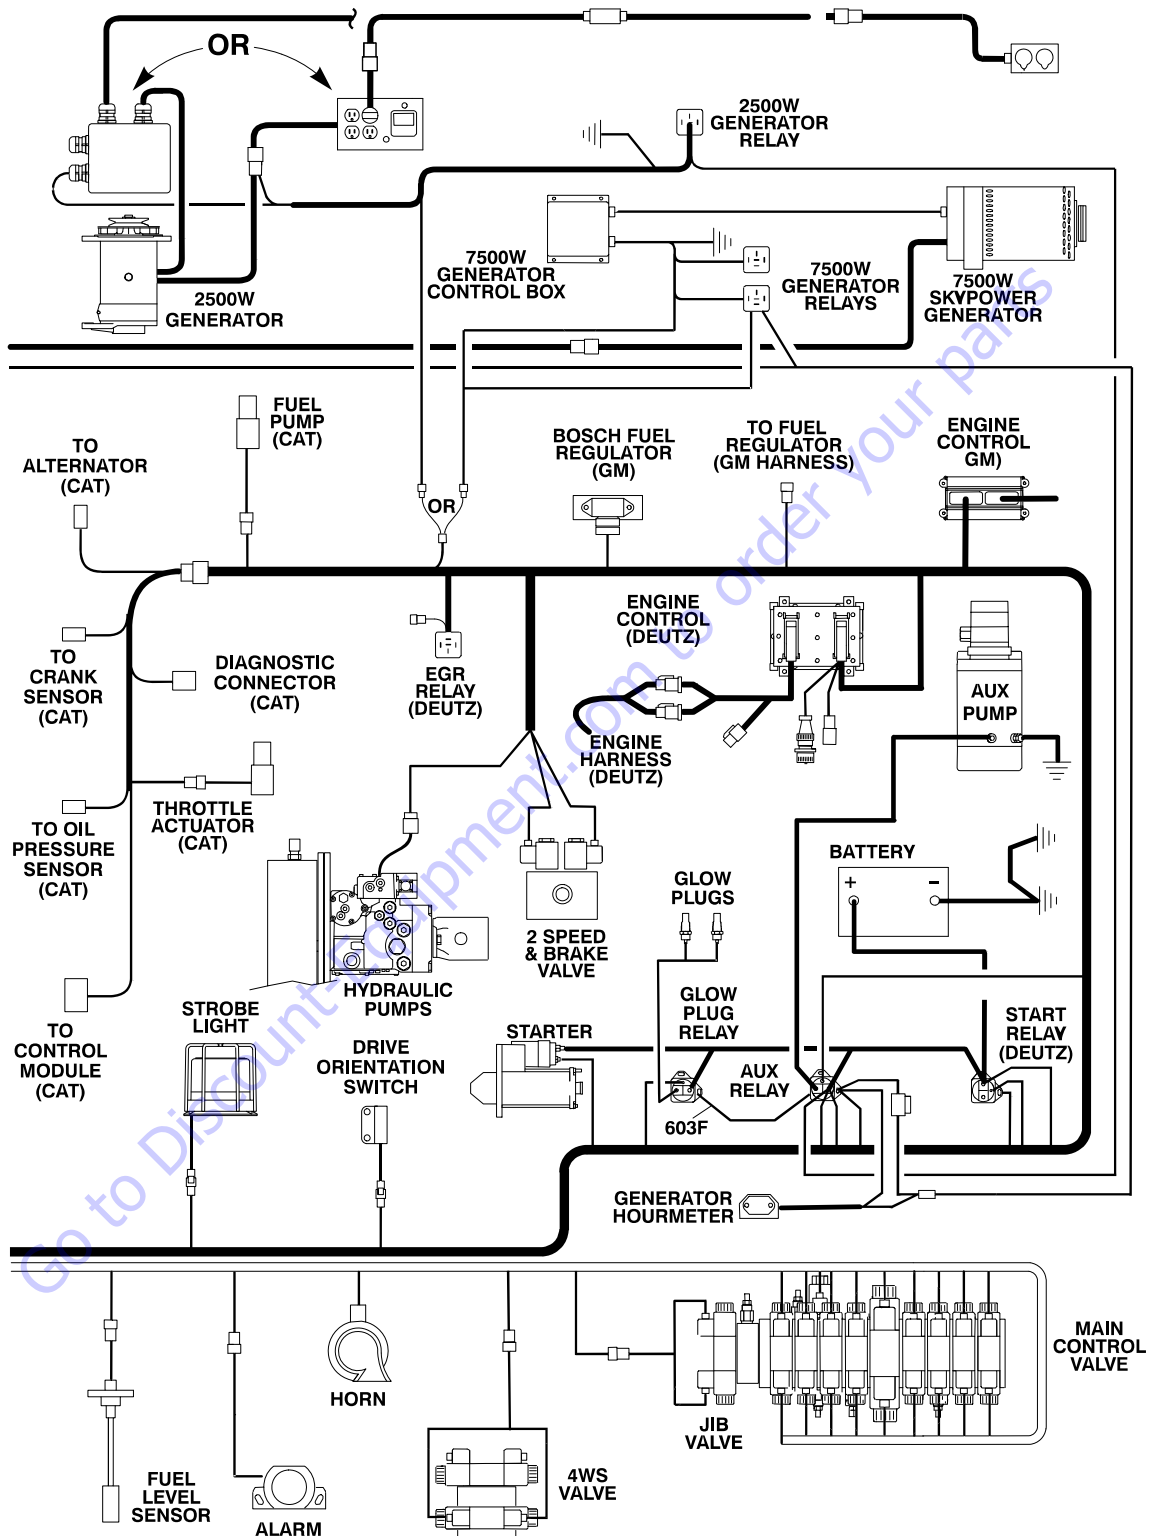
Electrical Components Installation With UGM - Sheet 2 of 2
